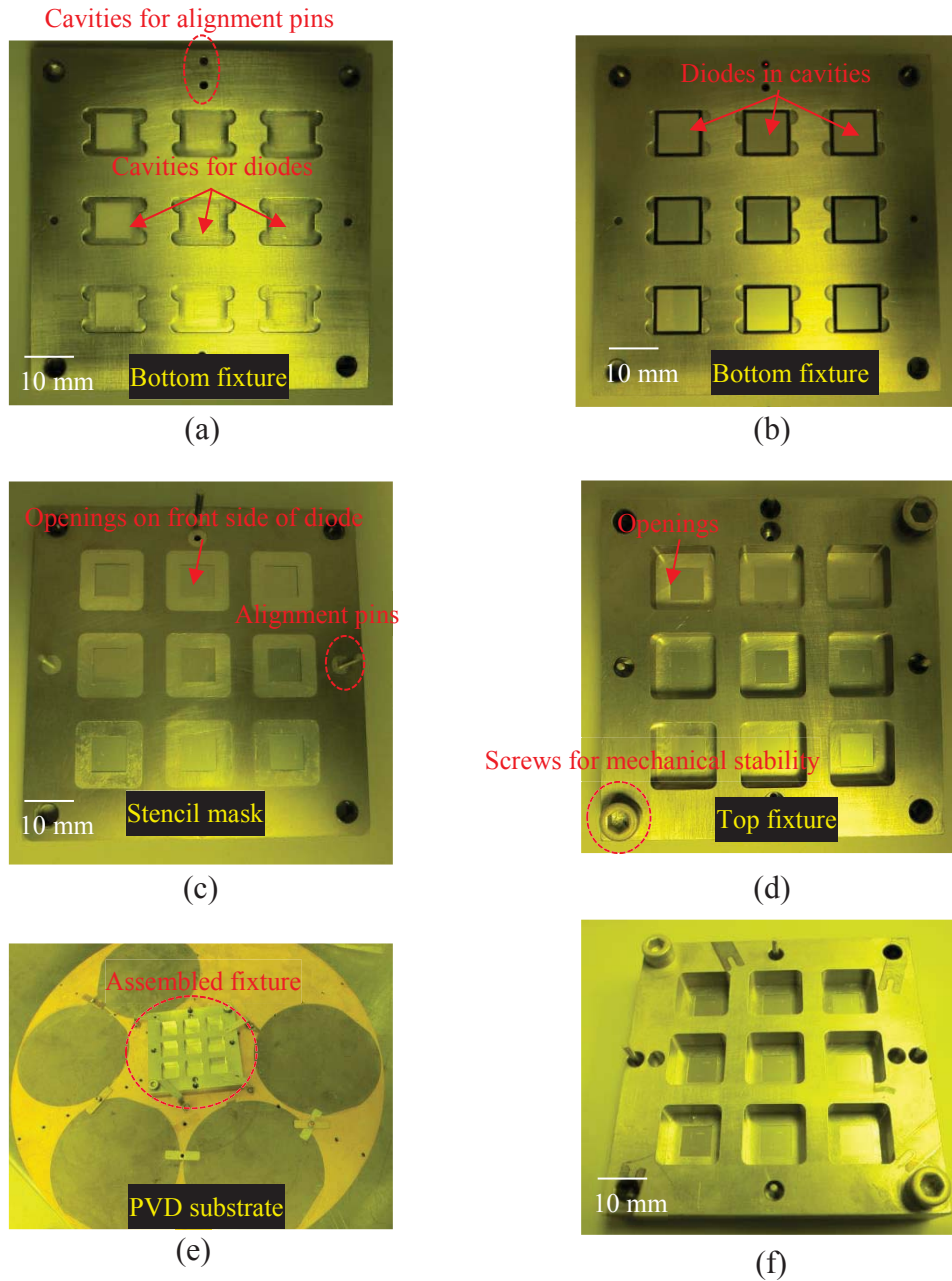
Demonstration of PVD fabrication steps using the fixture made of stainless steel with layouts in Figure B-10 and Figure B-11. Bottom fixture with cavities for diodes in Table 4-4 (a); placed diodes in cavities (b); stencil mask to provide openings for PVD (c); top fixture with screws for mechanical stability (d); assembled fixture on the PVD substrate (e); and after PVD process (f).
